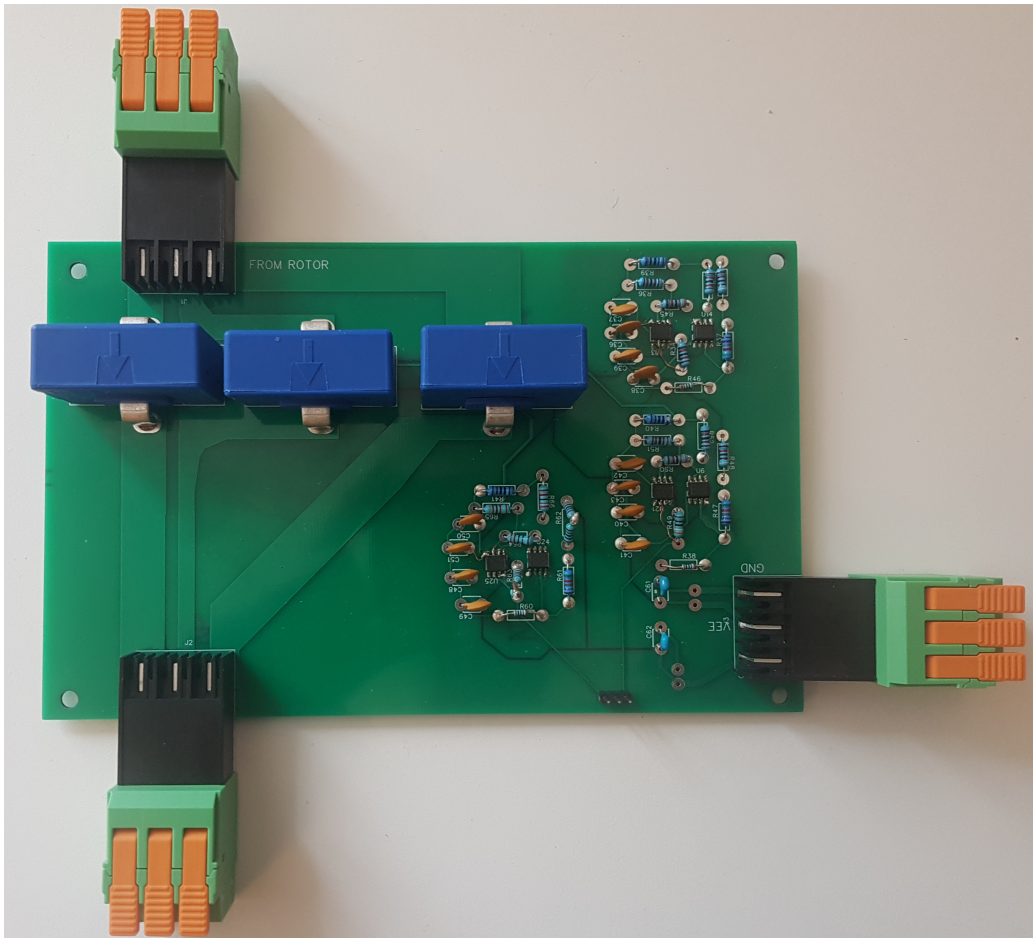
This is the PCB that measures and scales the rotor current. The board is mostly complete, although missing a few components. The exact layout can be seen in more detail in figure 6.6.
